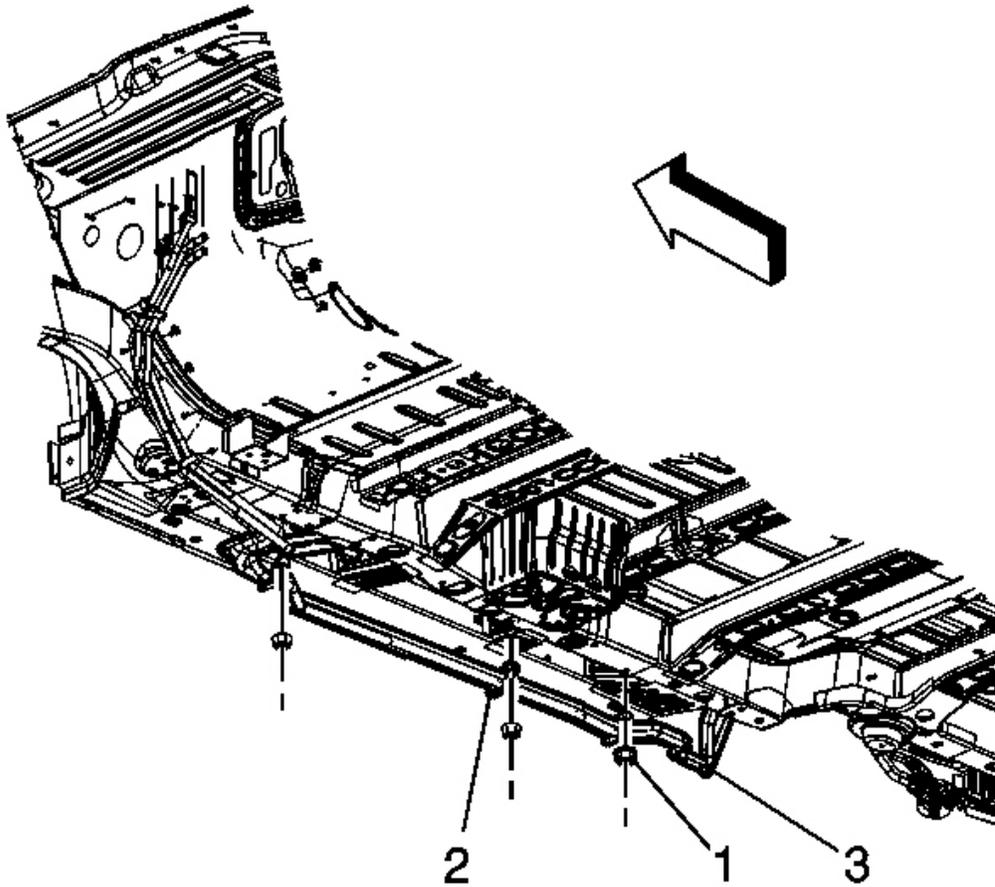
Identifying Auxiliary A/C Evaporator Tubes & Clamps
